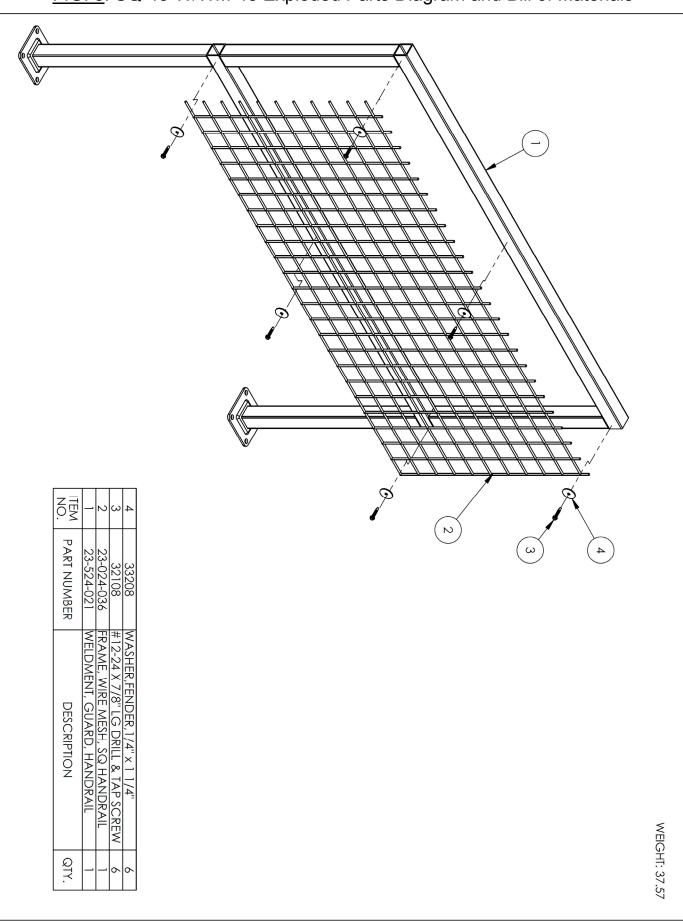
SQ-60-W/WM-60 Exploded Parts Diagram and Bill of Materials
